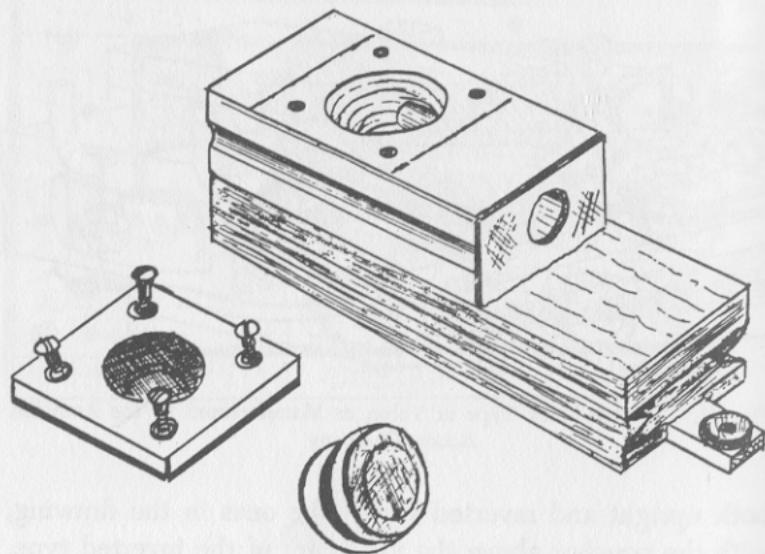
A Unit Containing the Valve, Pouch, Bleed, and Pneumatic, with Valve Taken Out
